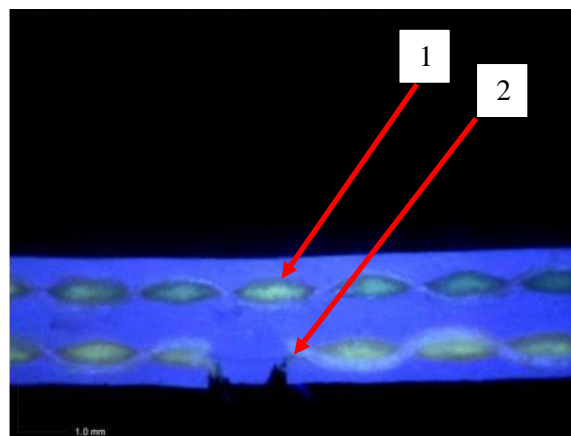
Single butt seam weld (1) – top butt seam showing limited dye penetration down center from exposed end; dye intensity drops moving outward in the butt seam. Bottom panels showing some limited penetration from open interior face (2).
